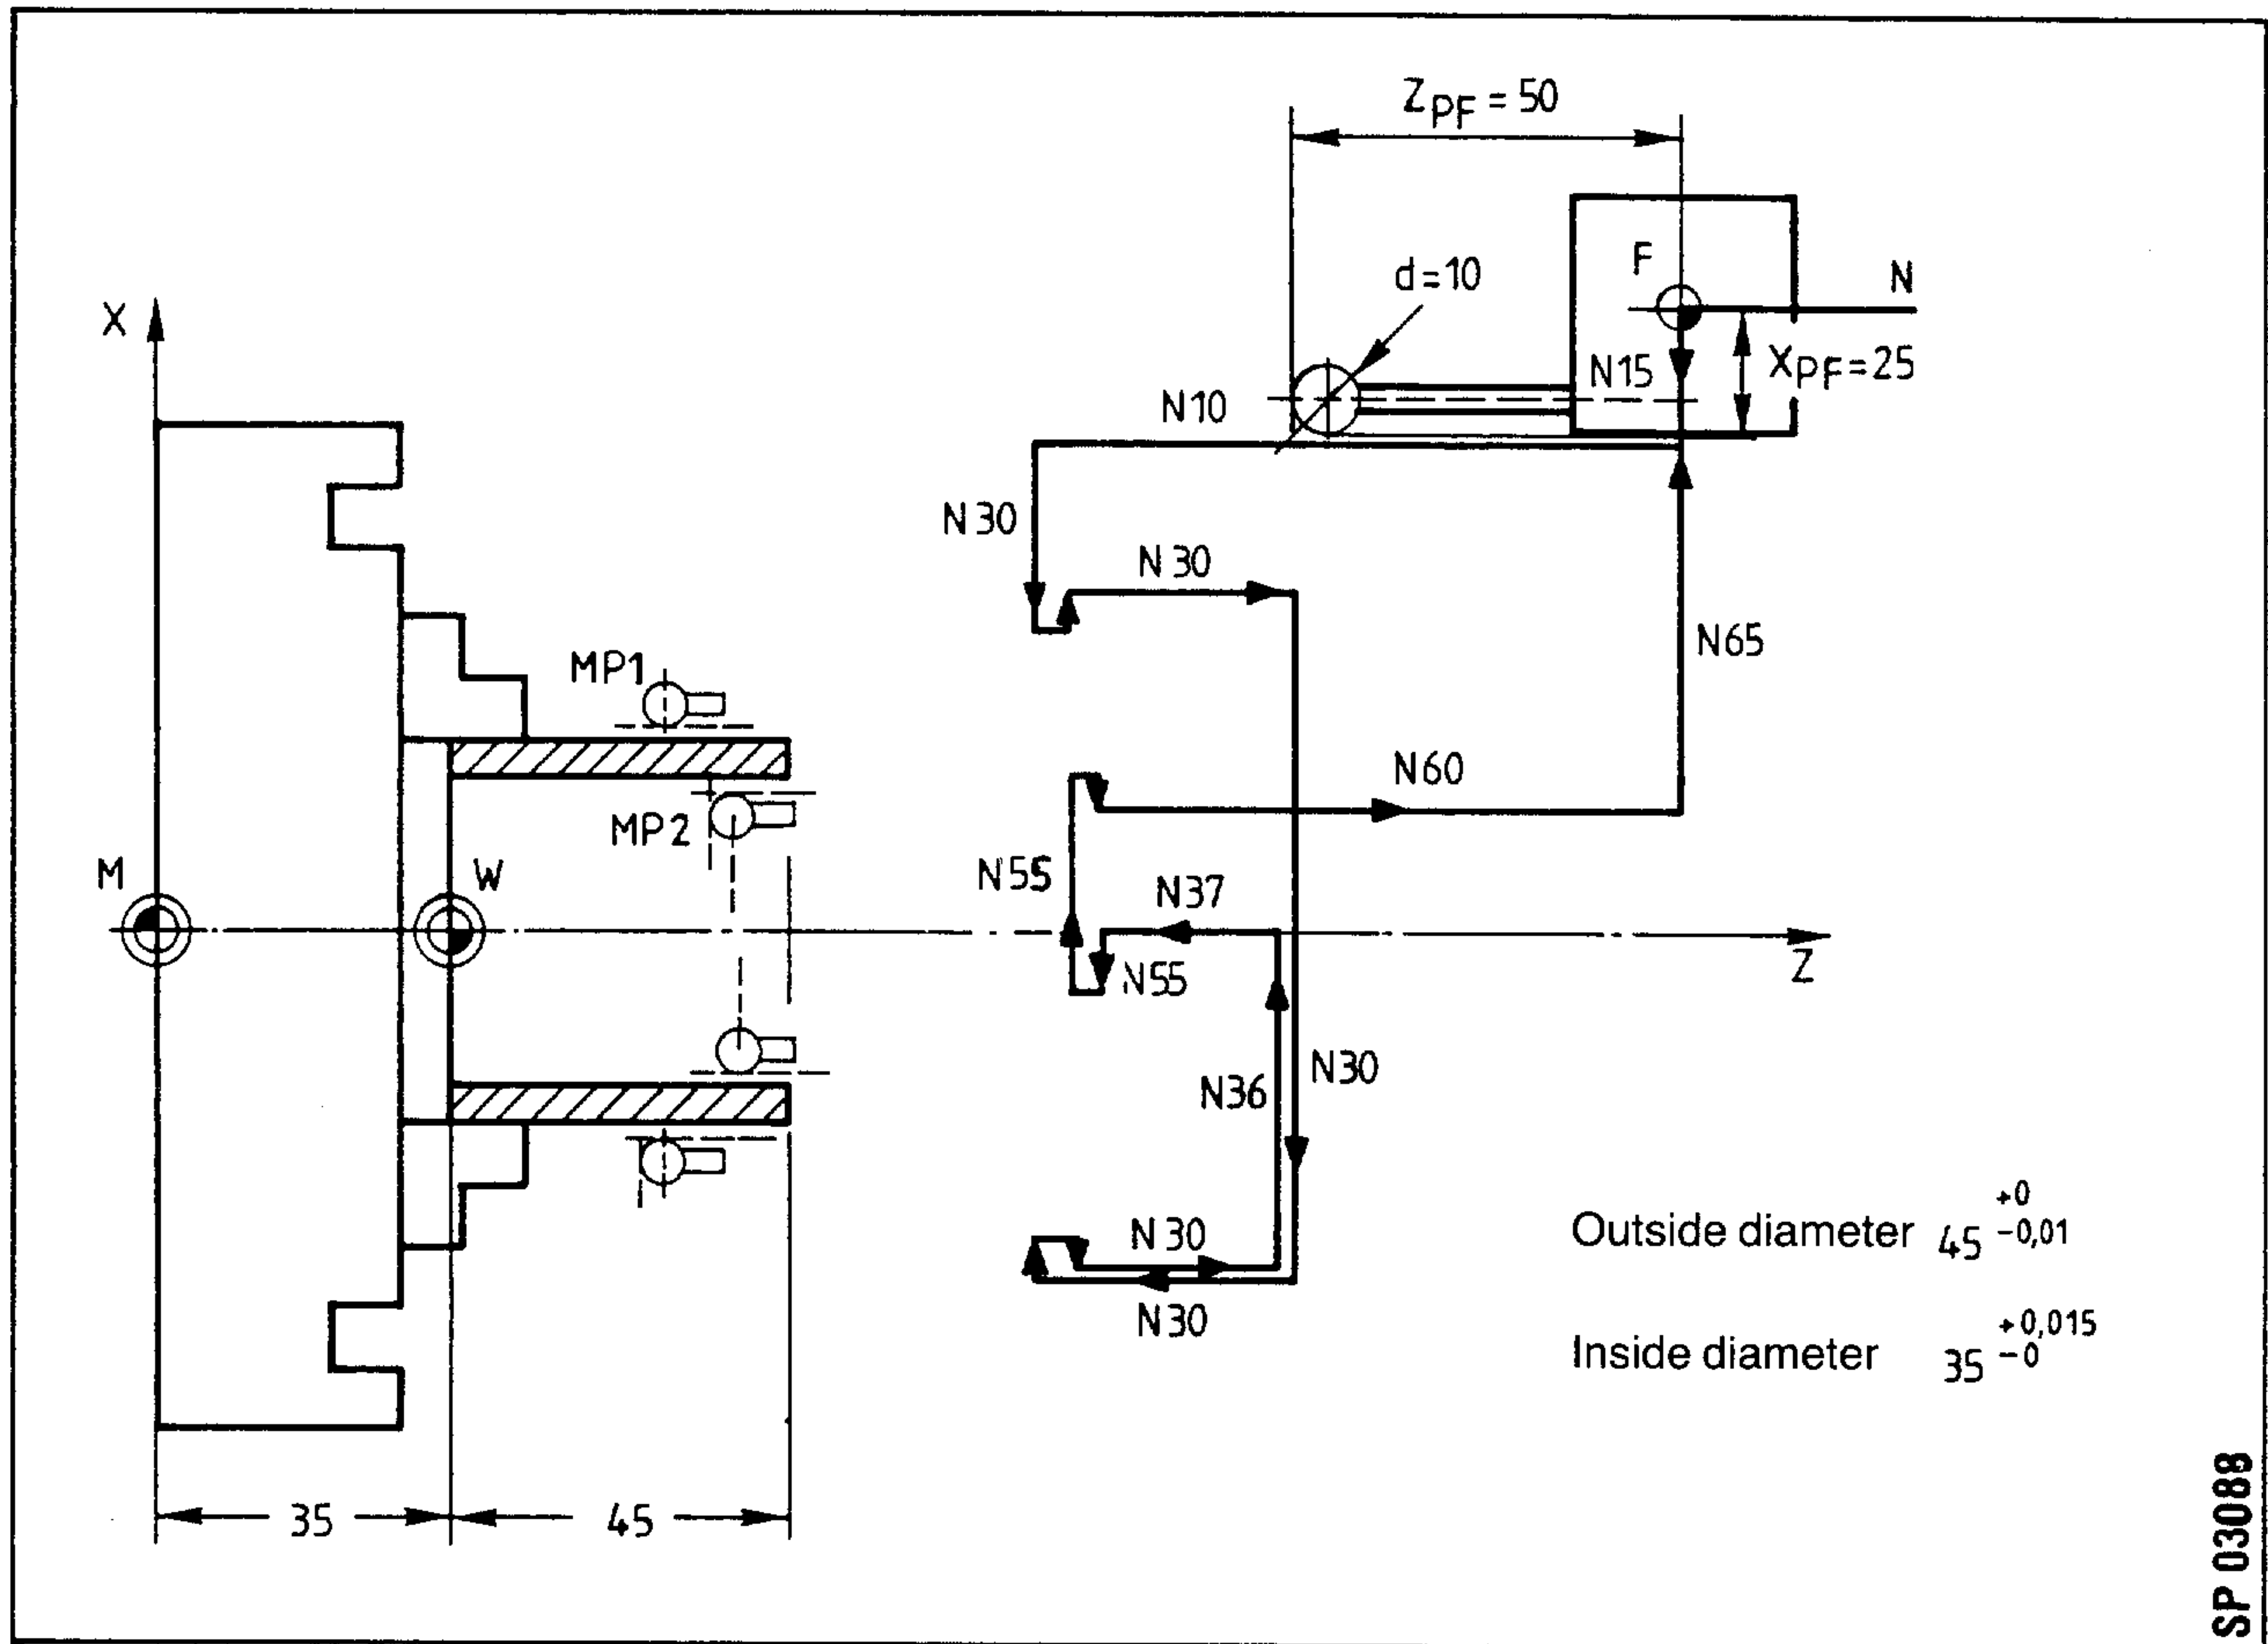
Workpiece measurement, 2-point measurement outside and inside
